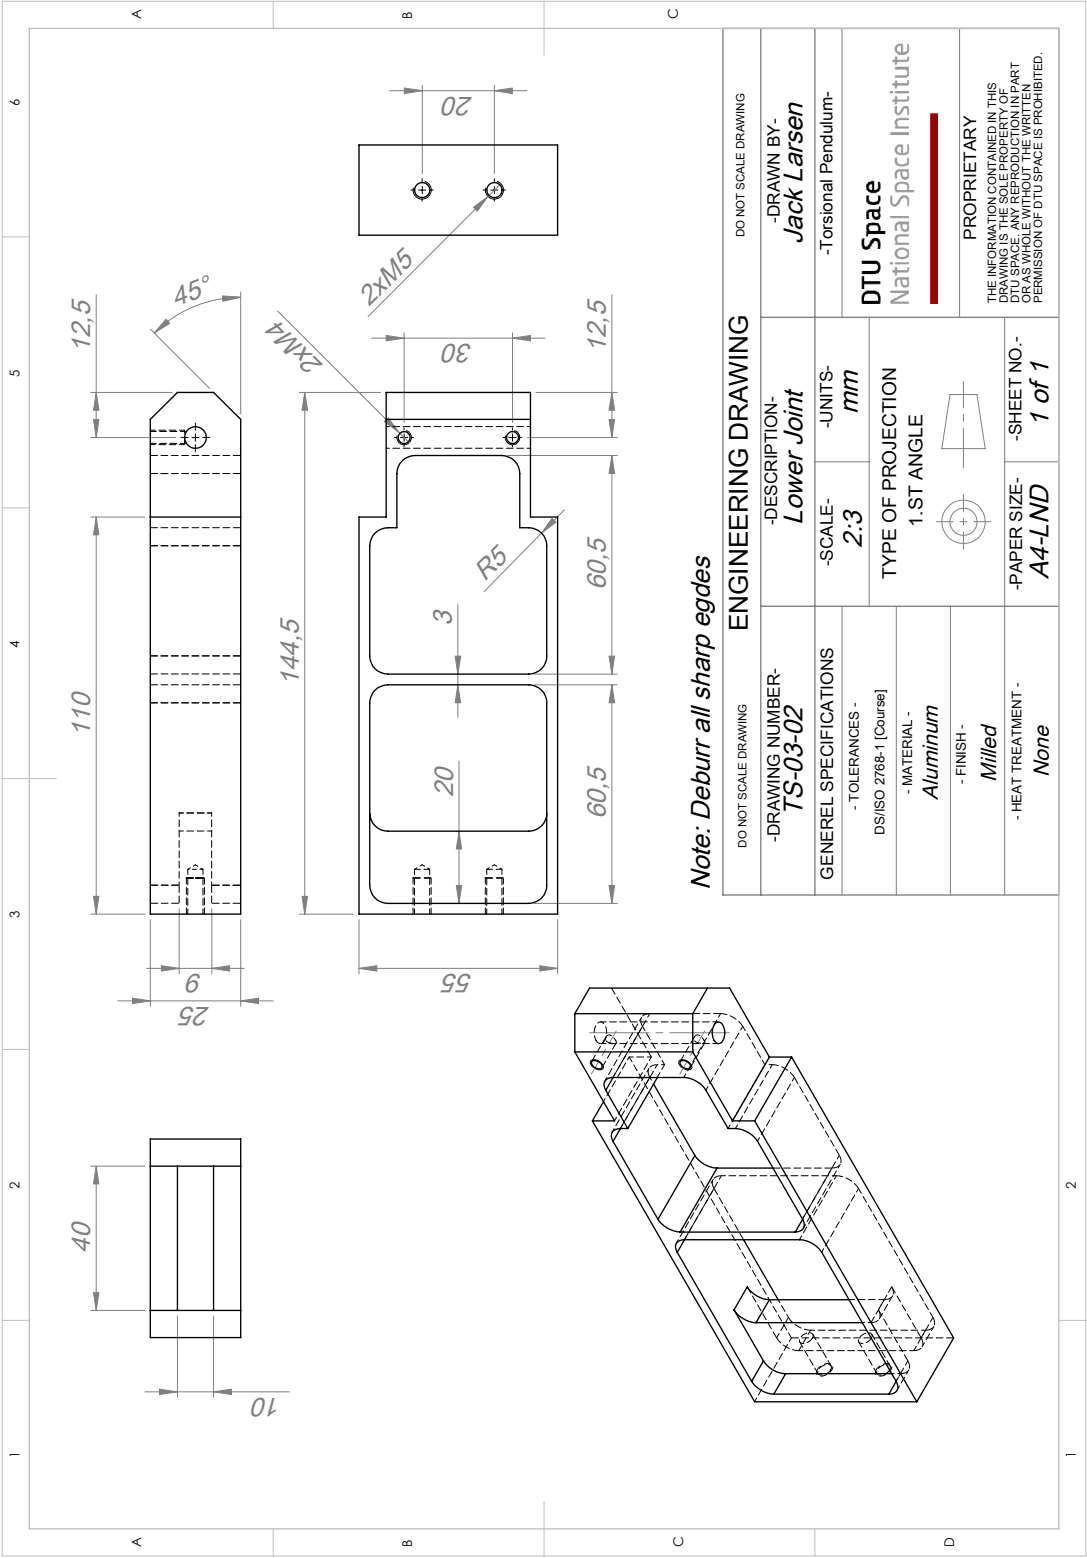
Test Setup: Lower part of joint carrying the horizontal arm.
